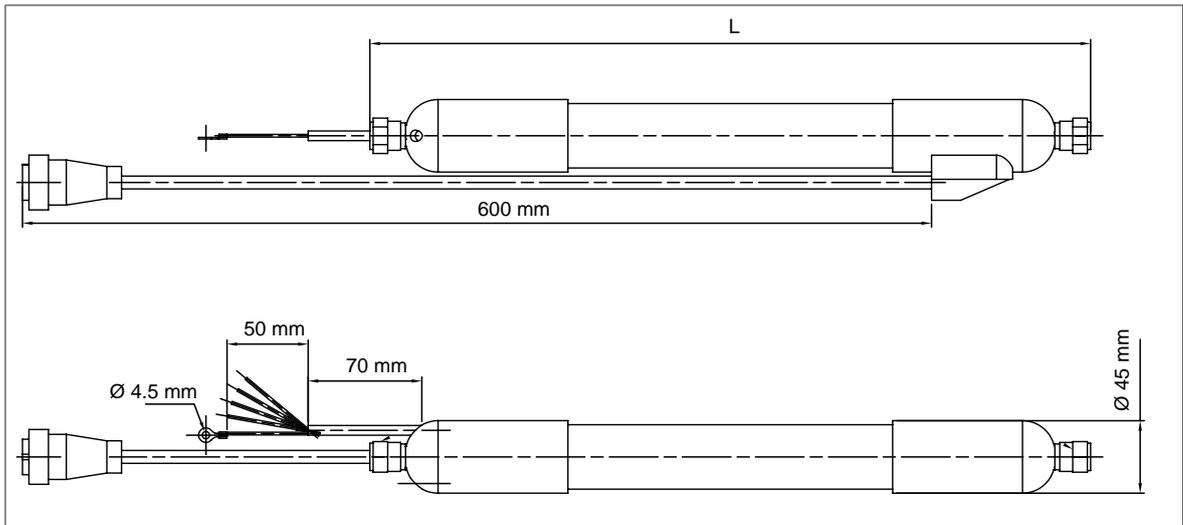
/1: Dimensioned drawing, Extrusion Version
